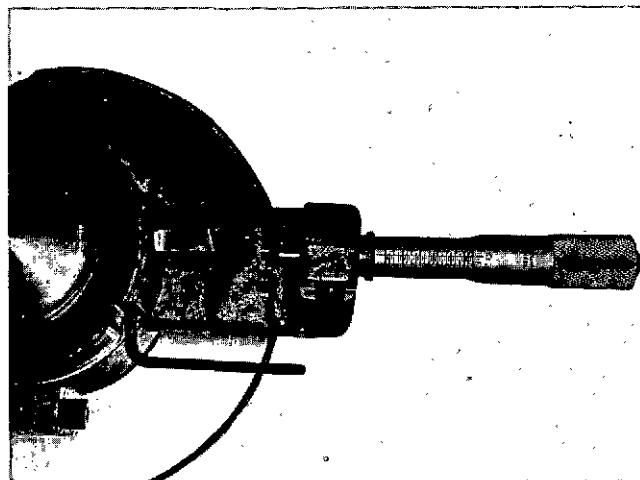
, V40188. Adjusting tool bit in cutter holder
